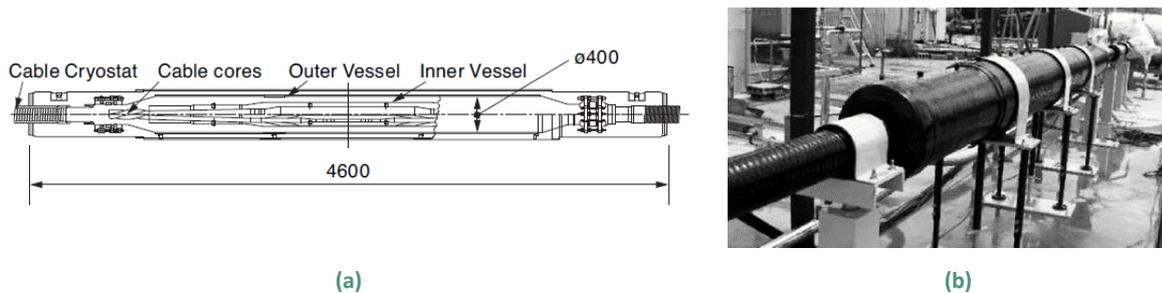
(a) Schematic view of "3-in-one" HTS joint. (b) Appearance of "3-in-one" HTS joint. [24]
